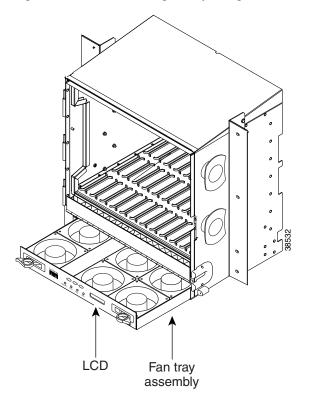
Removing or Replacing the Fan-Tray Assembly (Front Door Removed)
